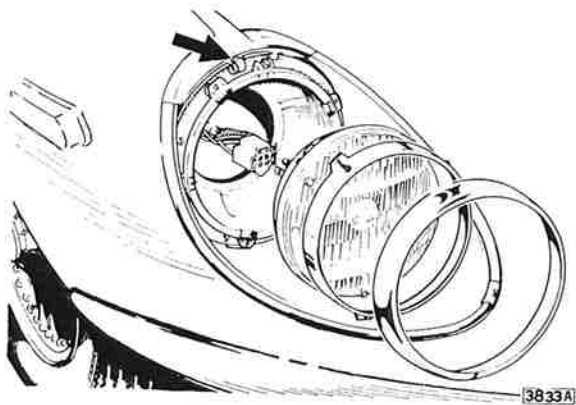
Headlamp sealed beam unit removal. The arrow indicates one of the spring clips retaining the rim.
